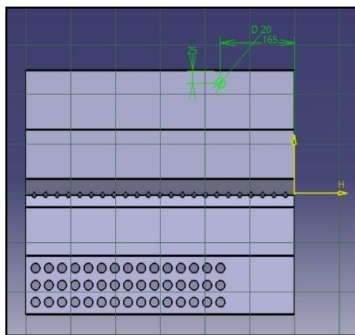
product Dry Channel & Holes grid in working Dry channel part and hole dimensions
